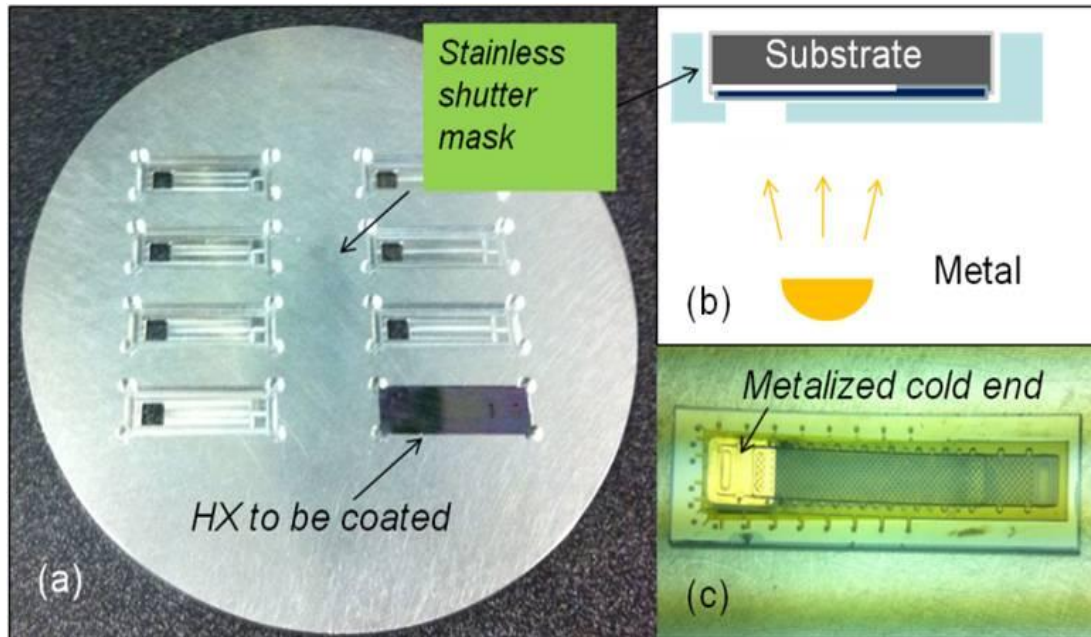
Metal coating on the cold end (a) stainless steel shutter mask; (b) evaporation on the cold end; (c) Metal coated HX.
